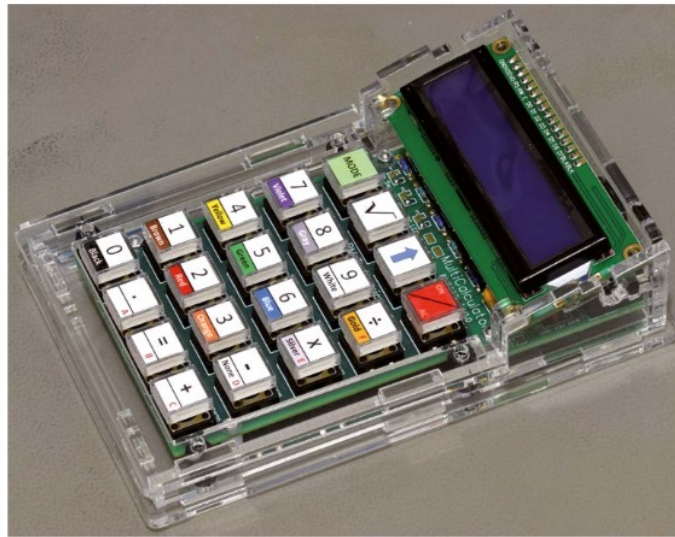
Small front panel, side panels, M3 standoffs with screws and U shaped panel placed.
